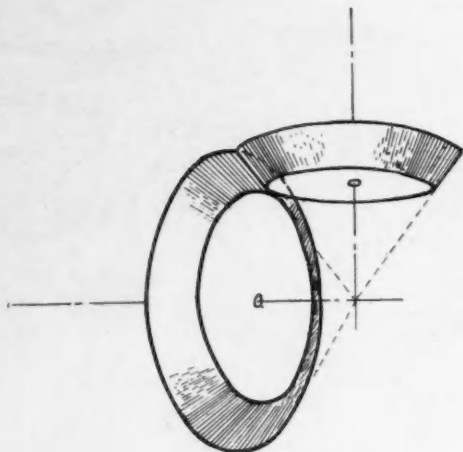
Pitch Surfaces for Bevel Gears Are Cones
